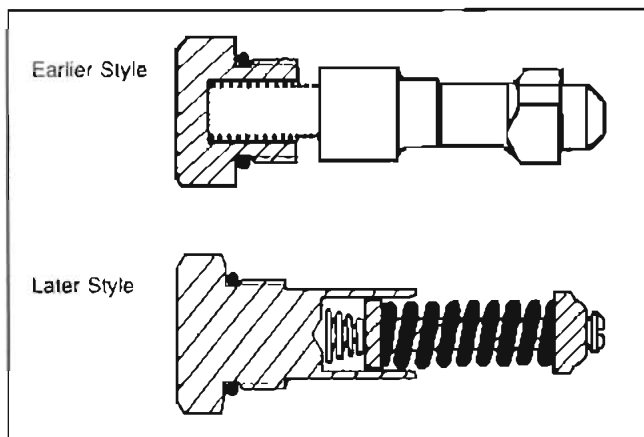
Check / High Pressure Relief Valves (Earlier and Later Styles)
